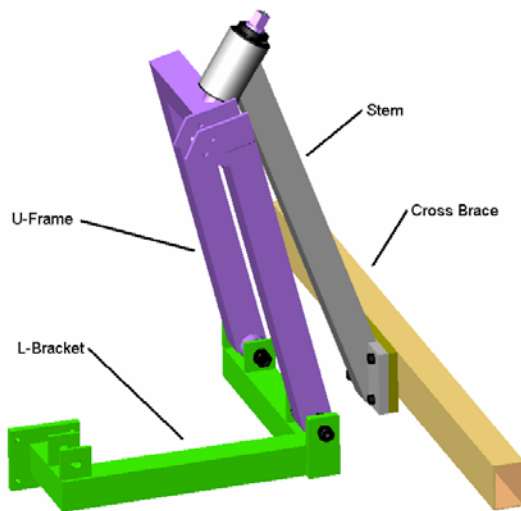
A 3-D Mechanical Desktop® and Solid Works® model of the BUV front end assembly design.
